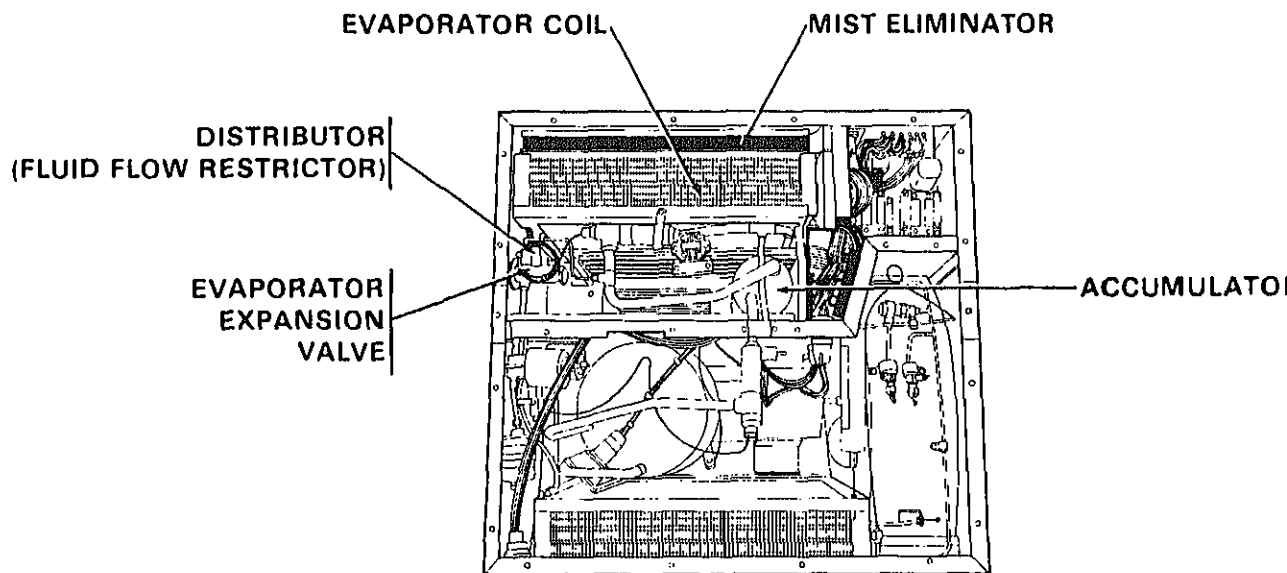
Air Conditioner, Evaporator Section (Sheet 1 of 2)
